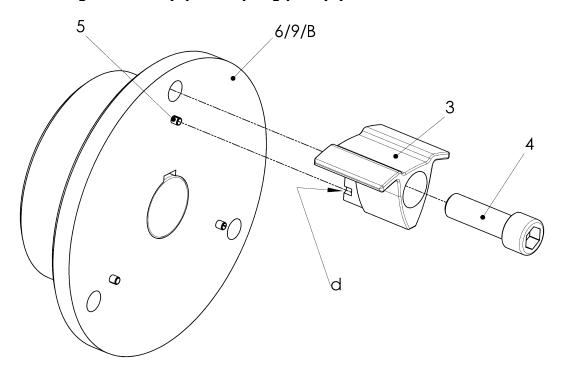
Mounting the claws (3) with spring pins (5)
